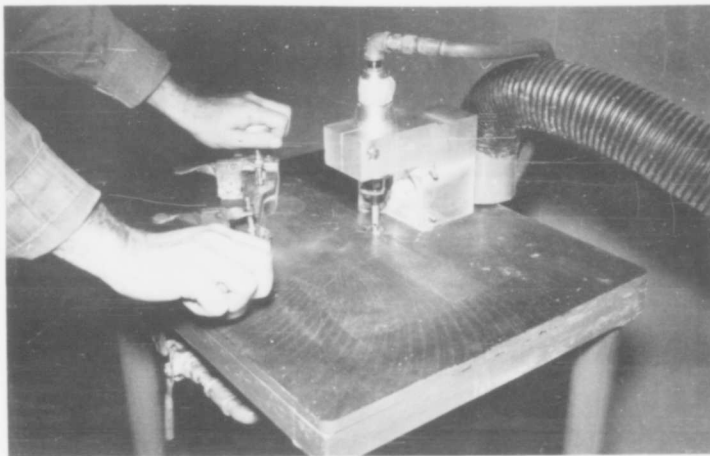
Air-Driven Router and Fixture for Tensile Specimens
